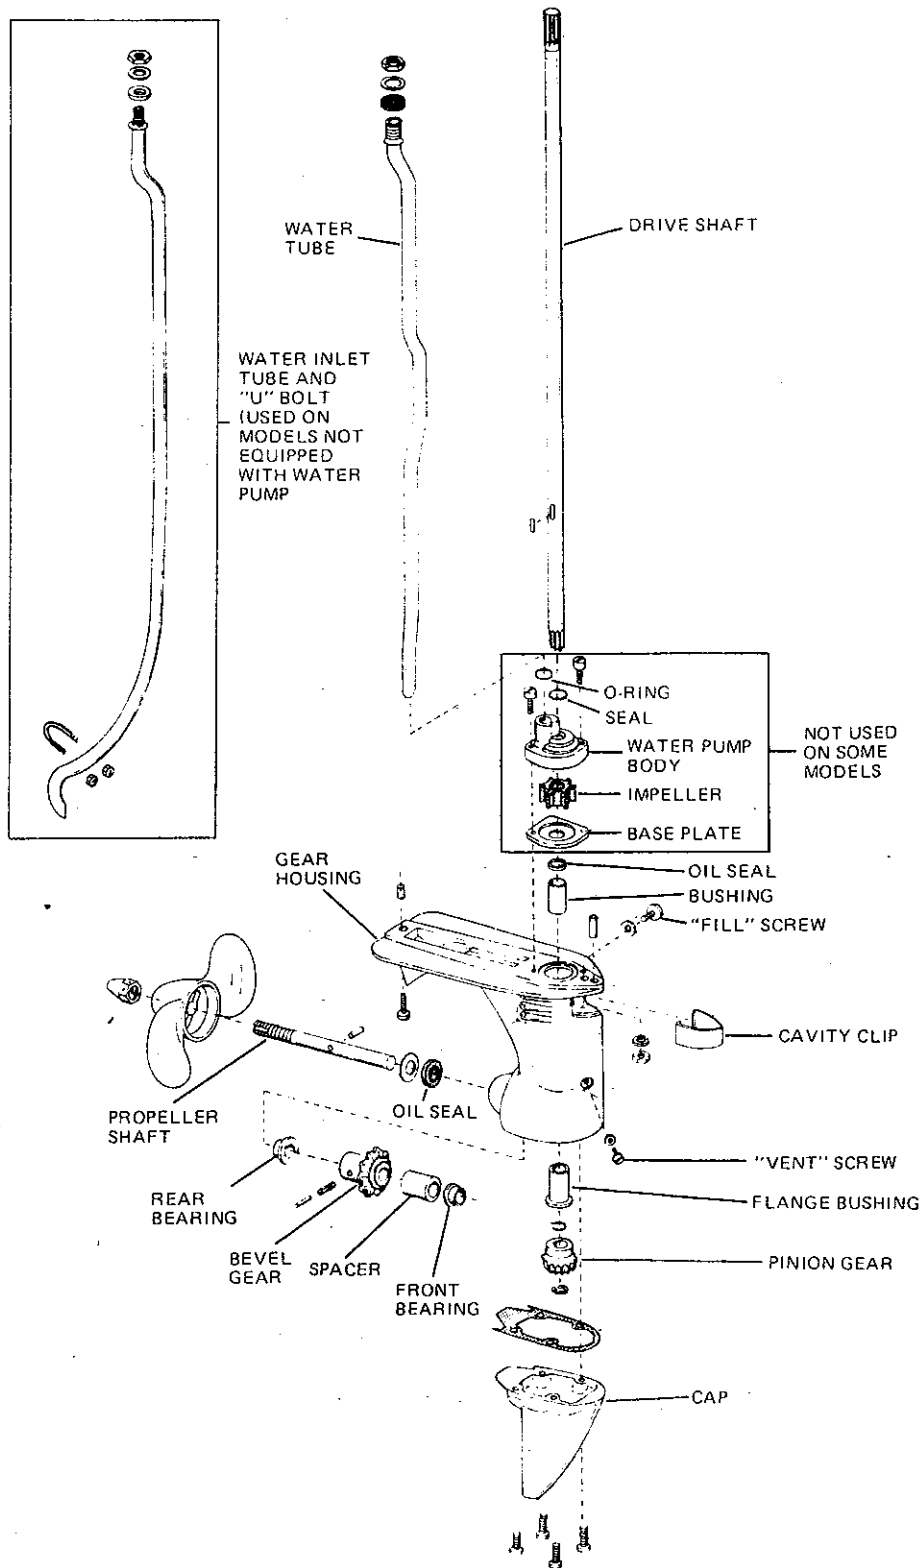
Exploded view of gear housing used on models manufactured prior to 1976.
